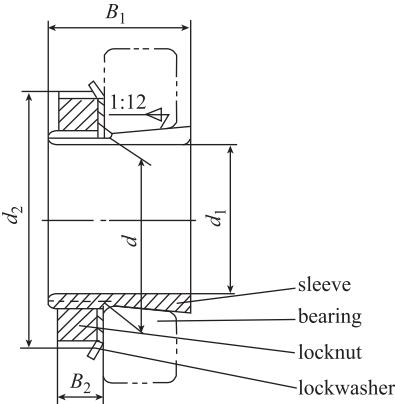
33 Installation dimension of the radial bearing with adapter sleeve (1)
